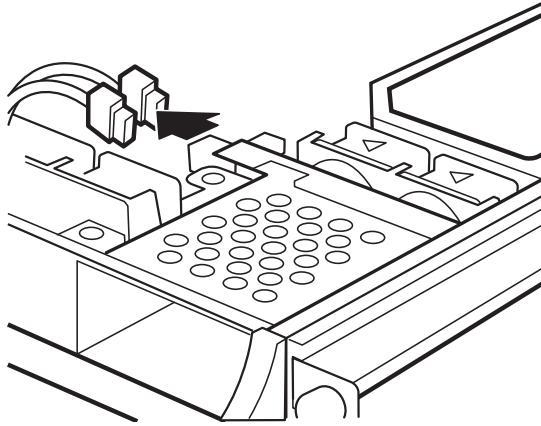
Disconnecting Cables From the SAS IF Assembly
